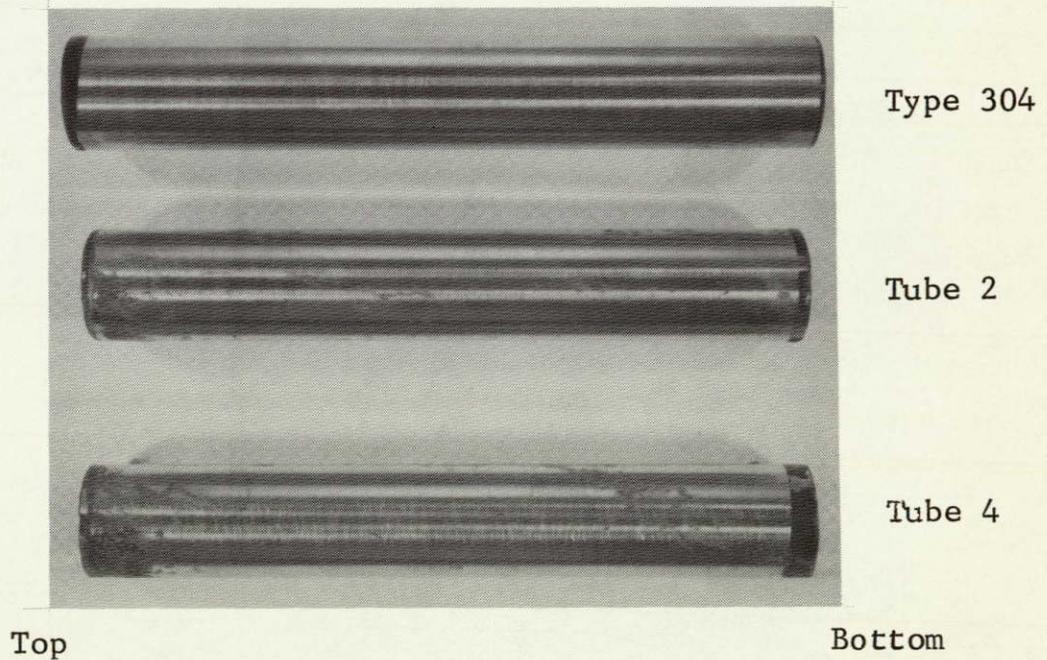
Appearance of Task II-d Tubes After Bend Testing.
